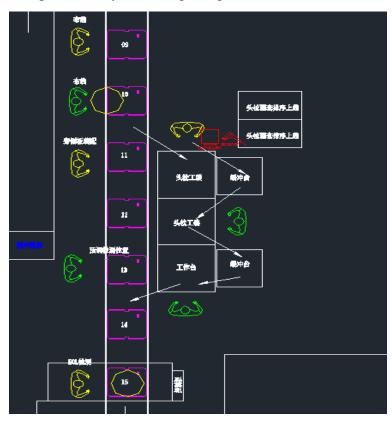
OLD LAYOUT HEADREST ASSEMBLY, LINE LEFT IN FIGURE AND HEADREST ASSEMBLY TO THE RIGHT.
